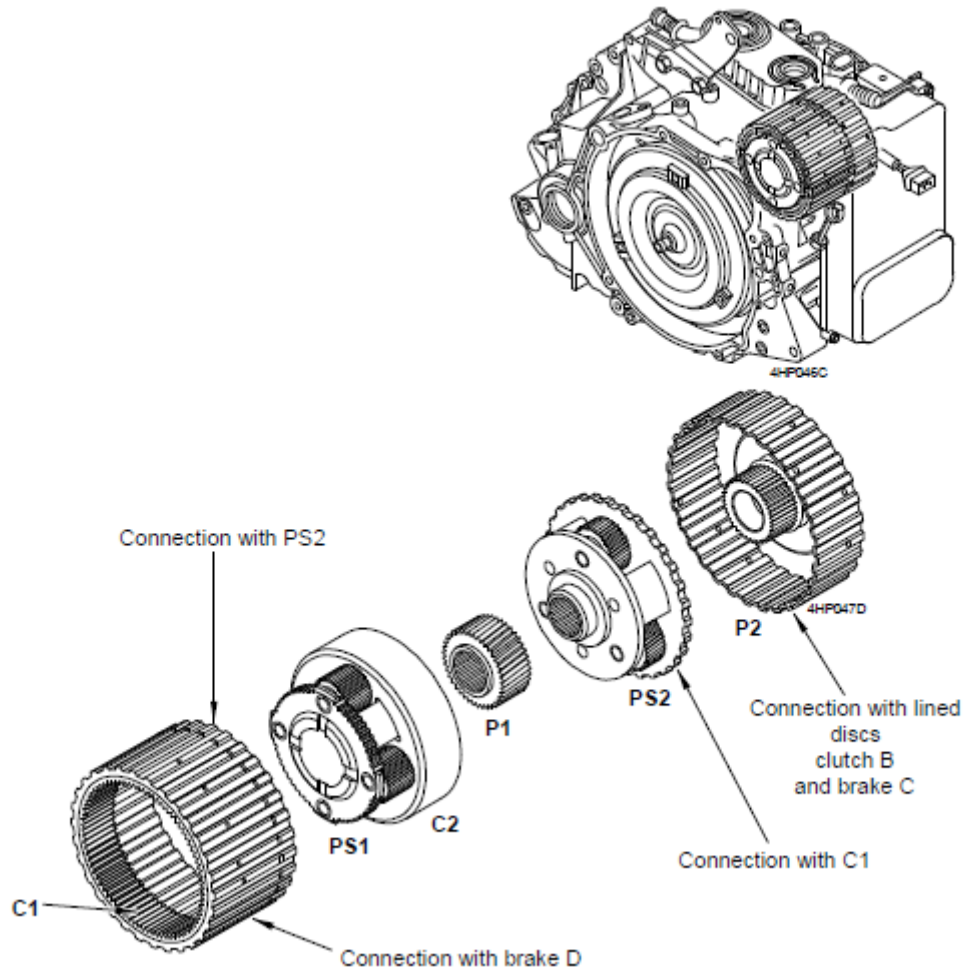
A view of the disassembled planetary set, *Citroen ZF 4HP20 Technical Book
